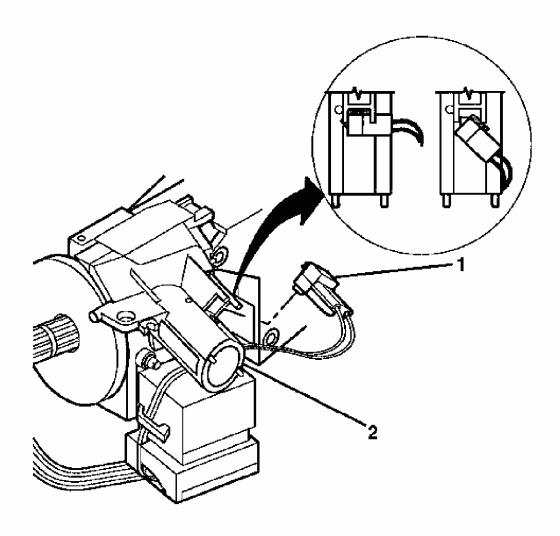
Identifying Key Alarm Connector At Ignition Lock Cylinder Case Courtesy of GENERAL MOTORS CORP.
